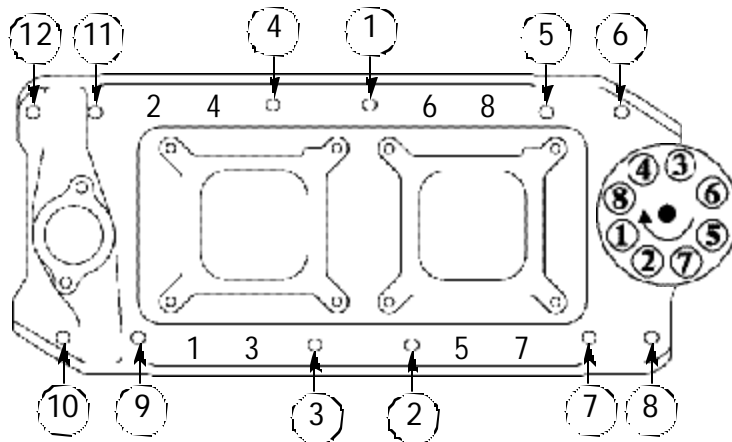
396-502 C.I.D. Chevrolet Bolt Torque Sequence
